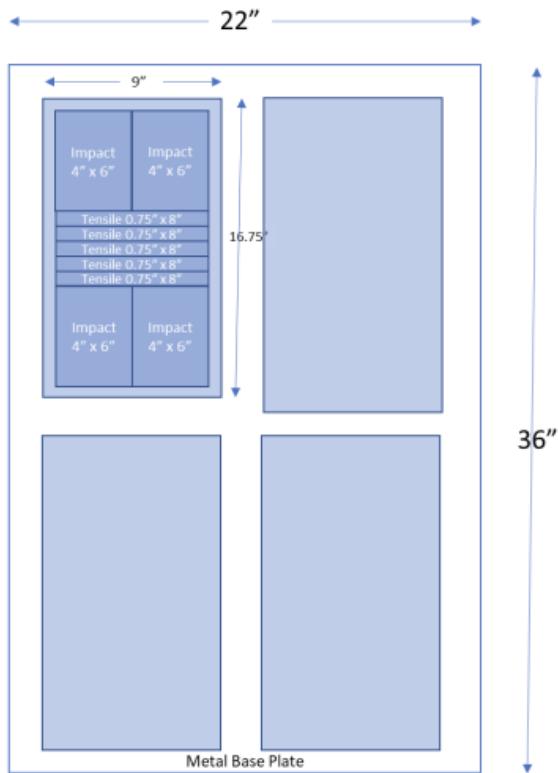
Metal Base Plate and Carbon Specimen Dimensions
